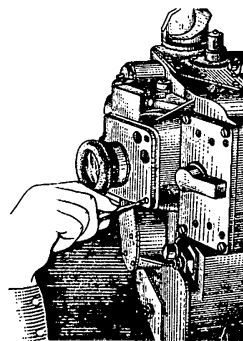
UNSCREWING SIGHT EYEPIECE FASTENING SCREWS
